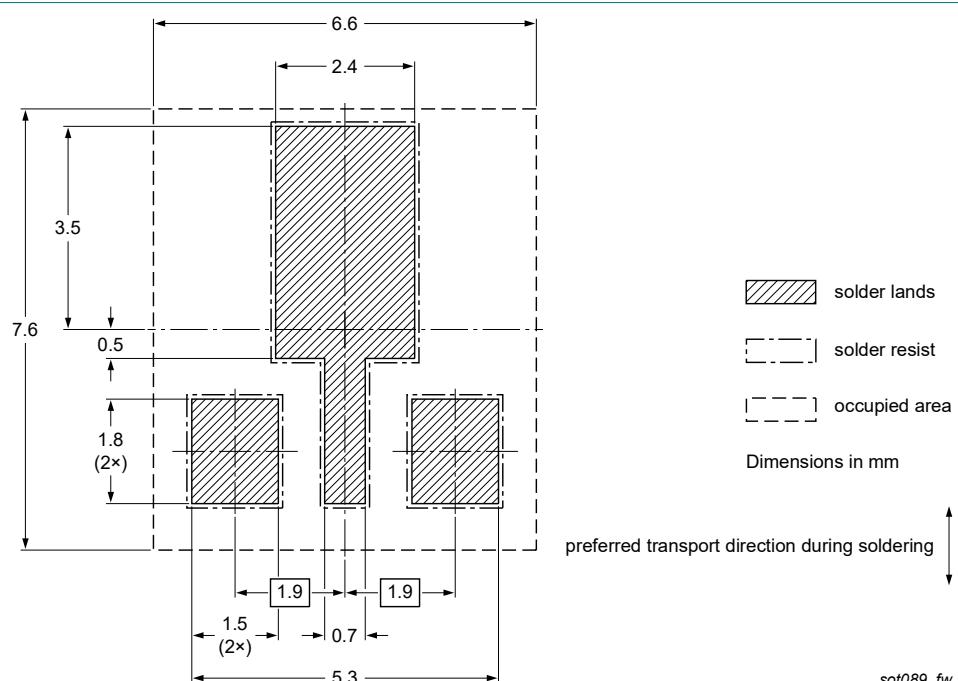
Wave soldering footprint for SOT89 (SC62)
